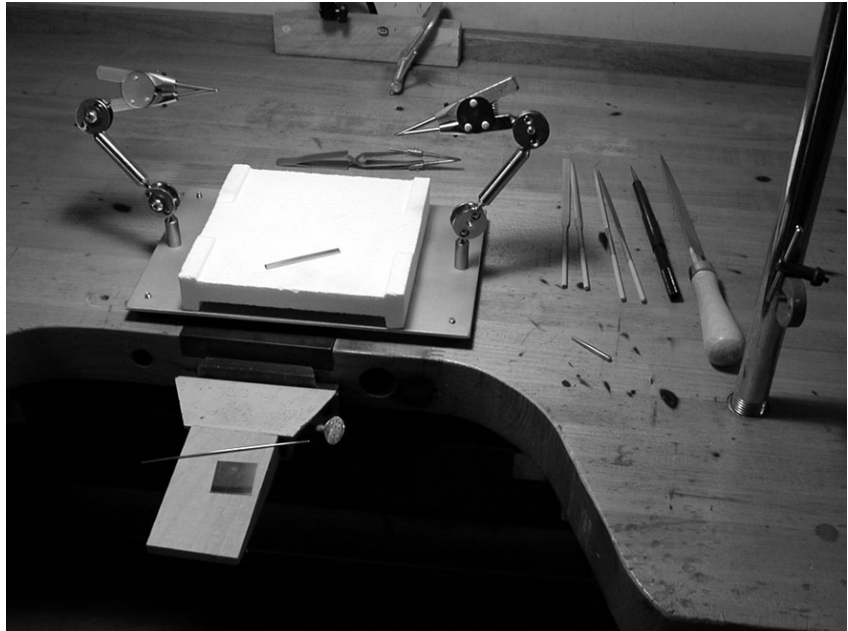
I began fabrication of this piece by placing my Platinum “setup” on a thoroughly cleaned bench. Visible is my Wesco aluminum oxide surface with tungsten carbide jaws, soldering tweezers with the same, Valtitan files, and tungsten carbide burnisher. I also designate a bench pin exclusively for Platinum. Oxygen/Propane as my fuel source.
